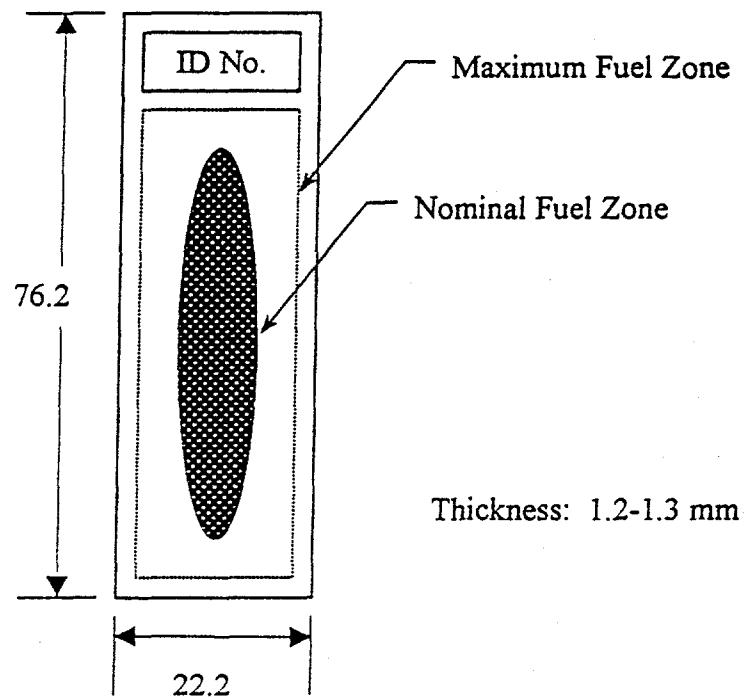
The redesigned fuel plate or microplate. All dimensions are in millimeters.
